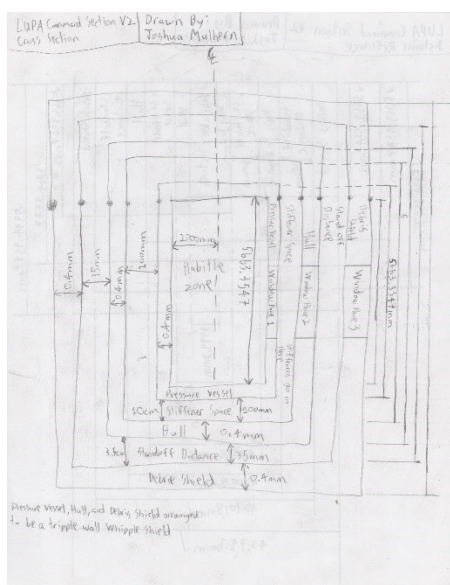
Hand Drawing LUPA Command Section V2 Cross-Section
